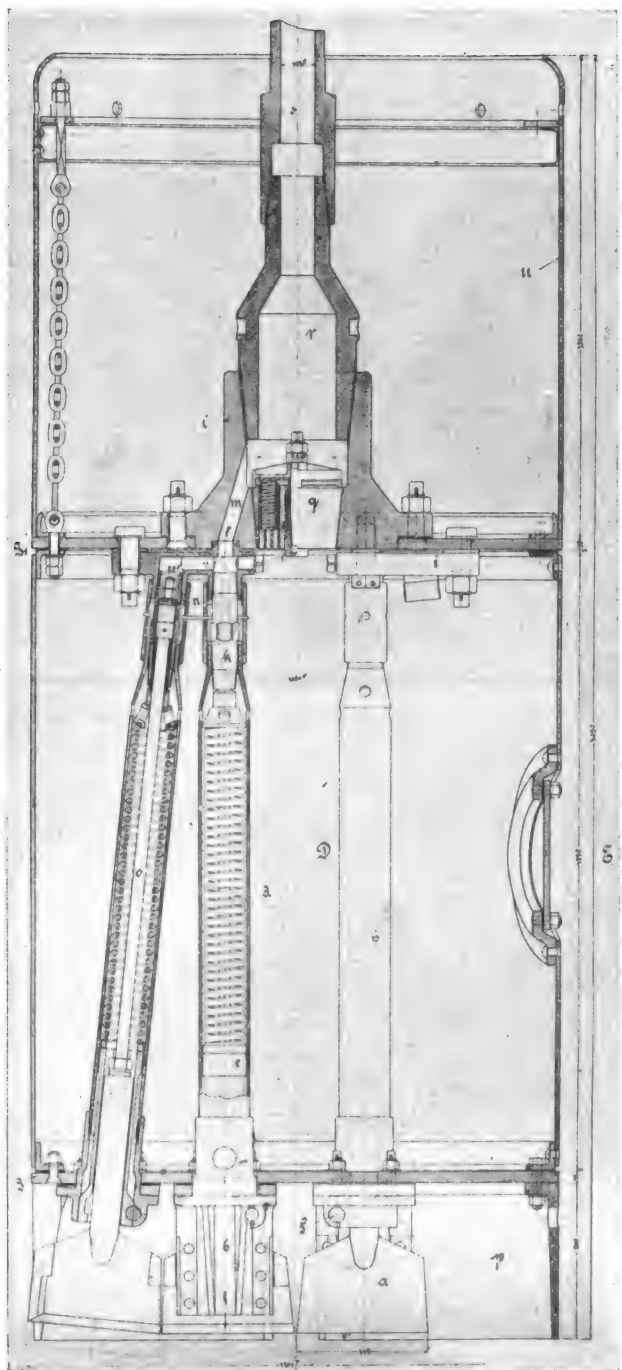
Shaft-boring Apparatus, worked by Hydraulic Shock.
